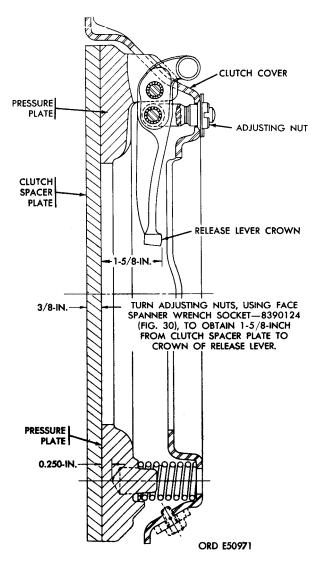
INSTALLING CLUTCH COVER ASSEMBLY.
